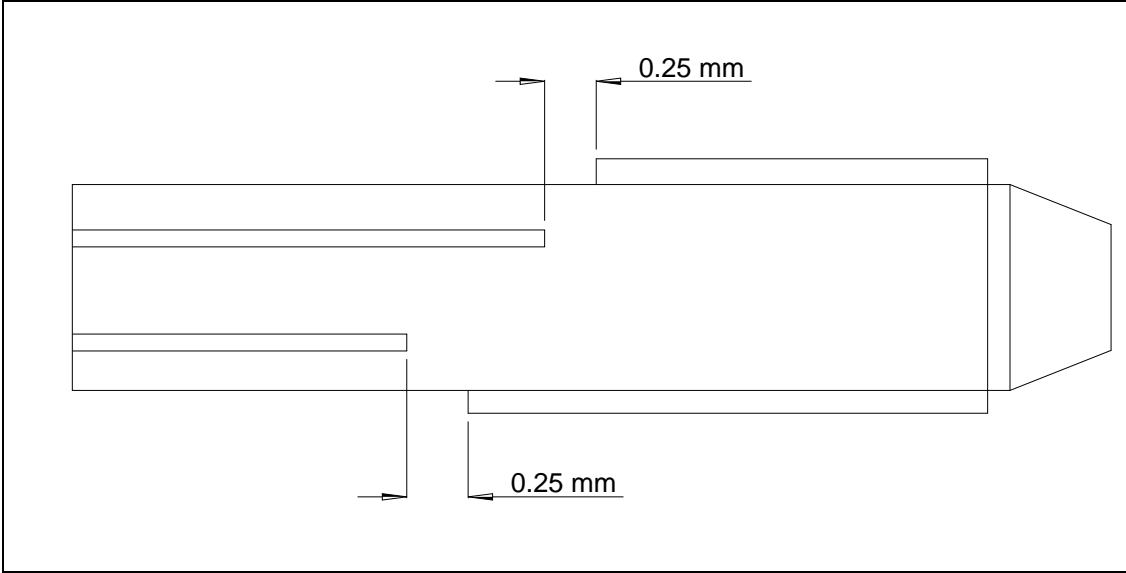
M.2 mother board pad and void dimensions (informative)
